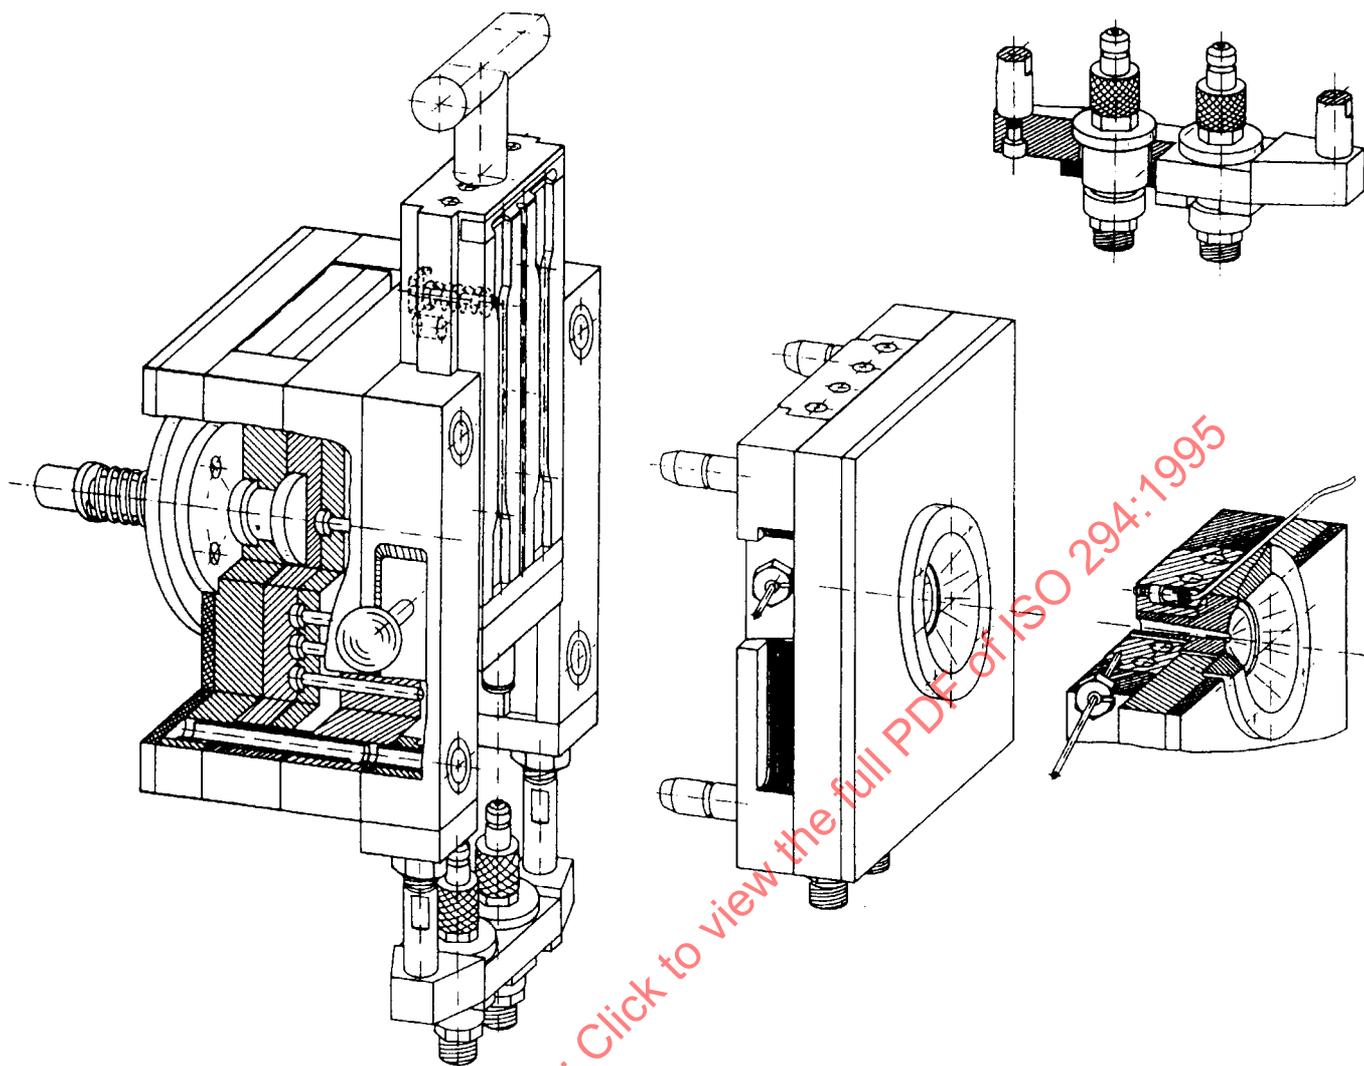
Perspective view of a mould with an interchangeable multi-cavity plate
